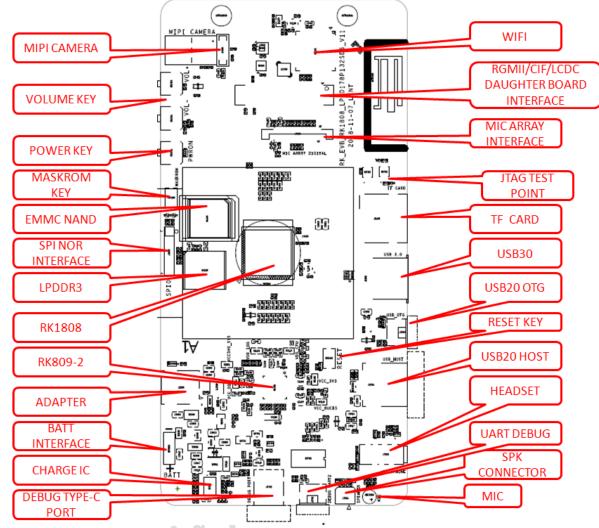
Modules layout of RK1808 EVB 1.1 PCB TOP Layer
